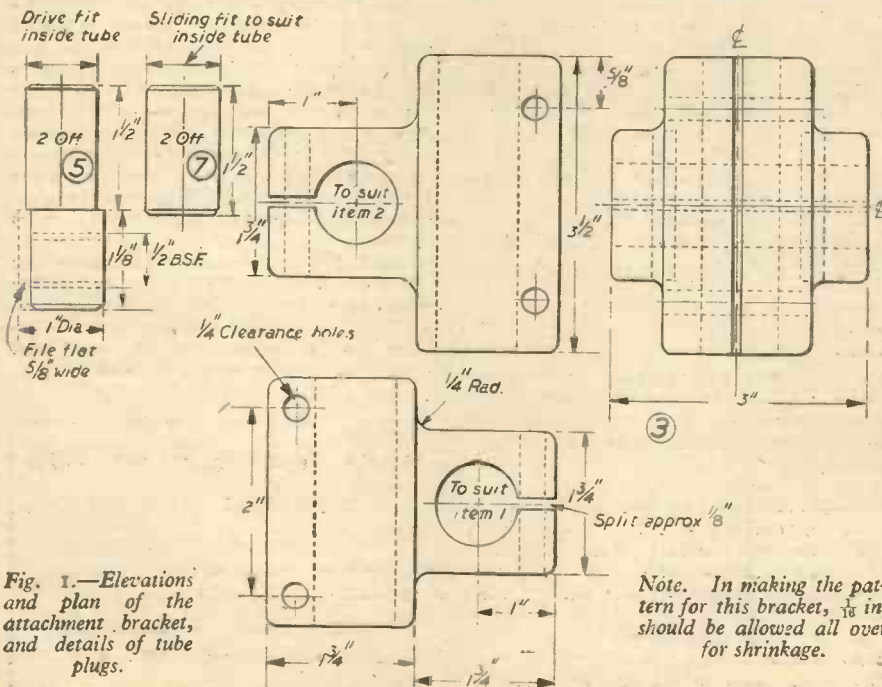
Elevations and plan of the attachment bracket, and details of tube plugs.
